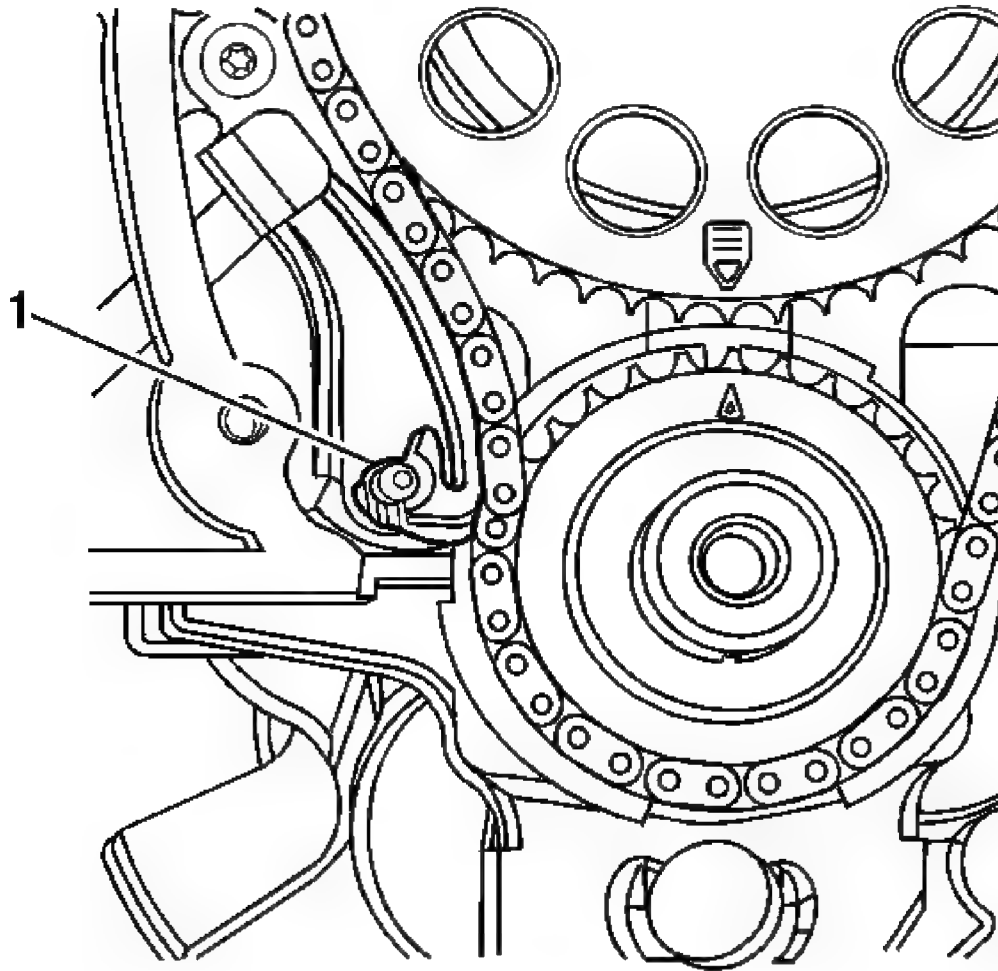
Locating Timing Chain Tensioner Shoe Pin
